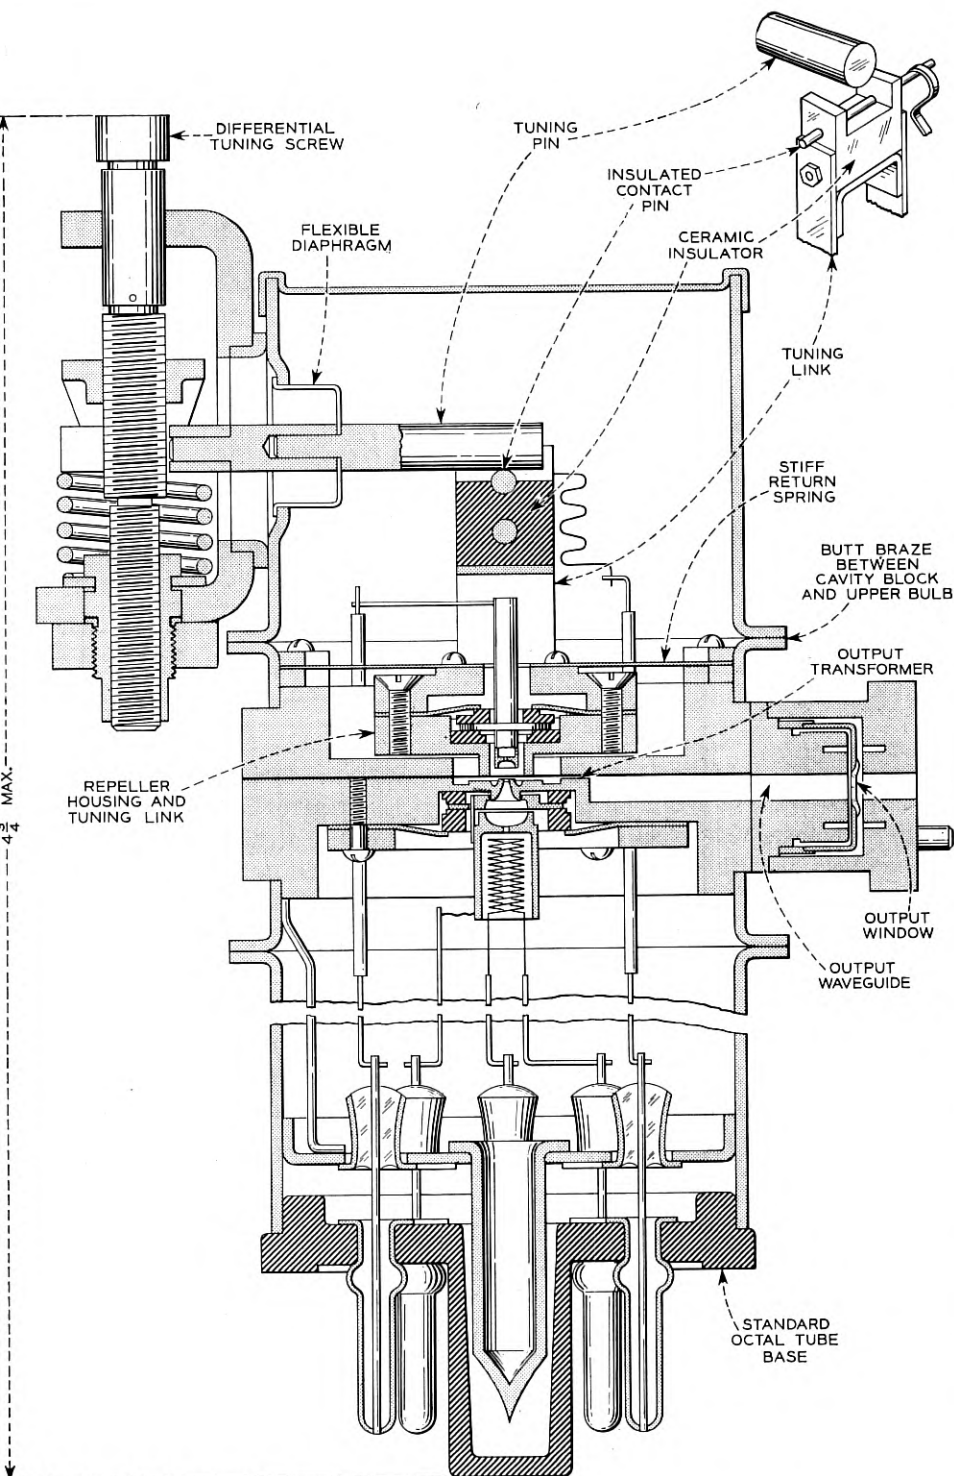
Layout of M1805, millimeter reflex klystron. The enlarged insert shows details of insulated contact pin which forms part of the alarm circuit.
